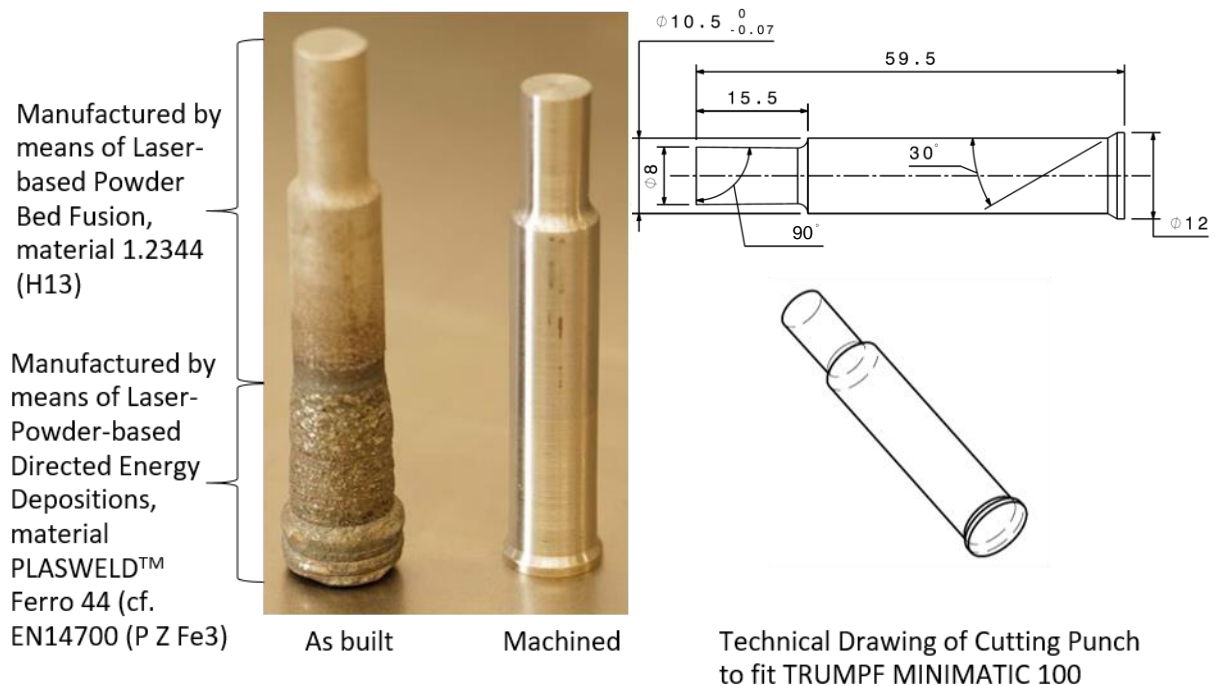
Hybrid printed 8 mm-cutting punch; left: as-built condition and (middle) machined by means of turning and grinding; right: technical drawing of cutting punch
